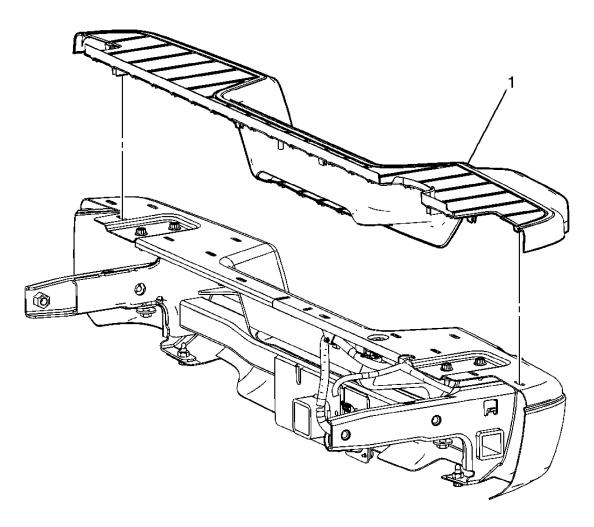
Step Pad Replacement - Rear Bumper Courtesy of GENERAL MOTORS CORP.
